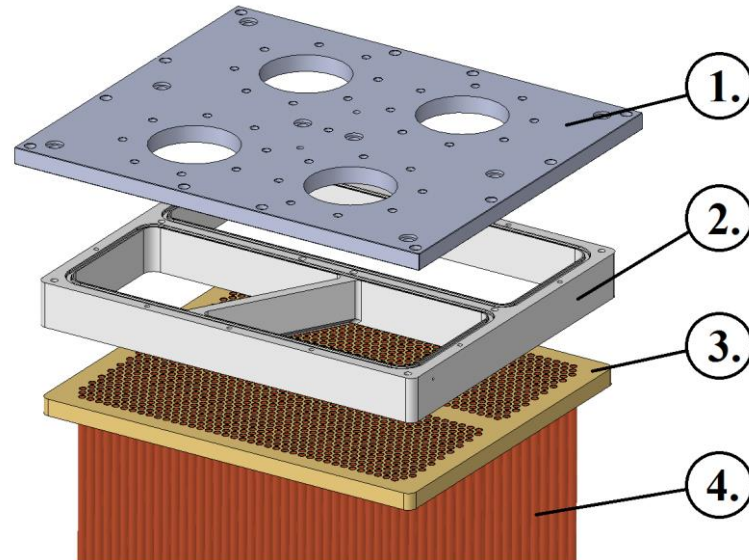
Exploded view of the most vital components of the single rack. 1: Top plate. 2: Flow splitter frame. 3: Pipe holding plate. 4: Pipes.
